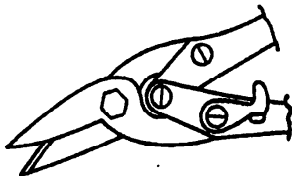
Type II, class 4, design 2, compound-lever hand shears, circular cutting to right.
